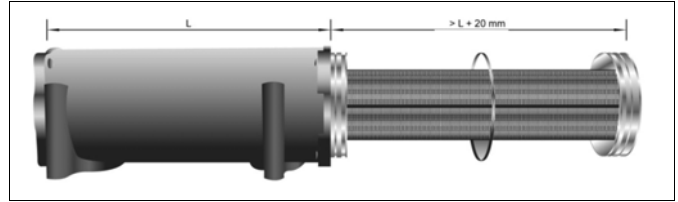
Required clearance for disassembling the pipe bundle (example)
